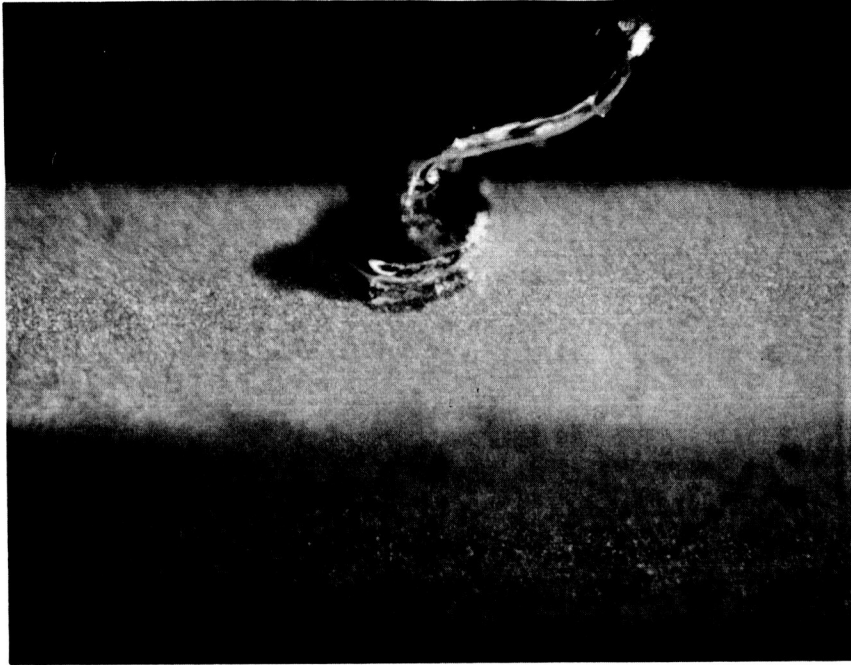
A Close-up View of the Nail-head Bond in Fig. 24
